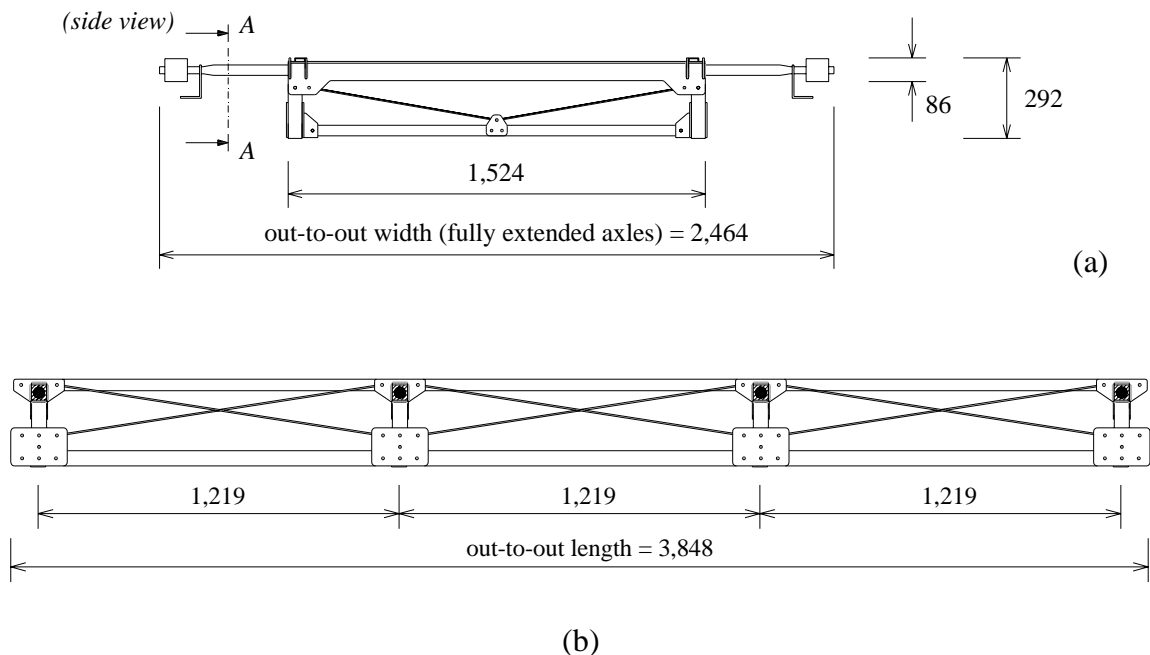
Dimensions of cart framework: (a) front view; and (b) side view A-A. Not to scale, dimensions in mm.
